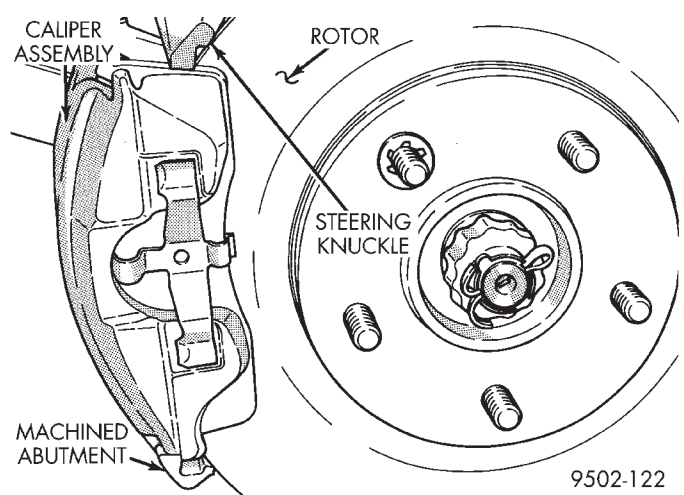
Brake Caliper Mounting To Steering Knuckle
